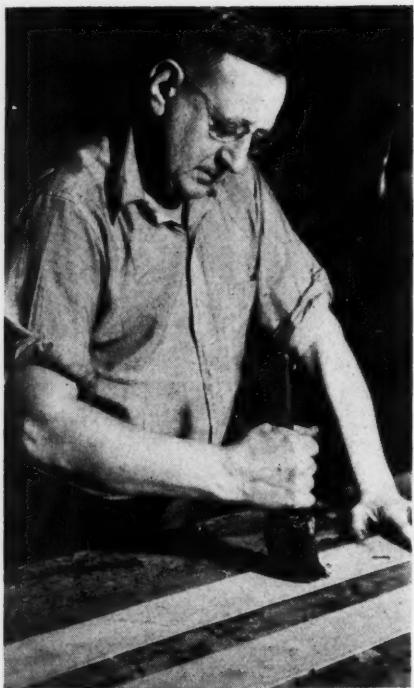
The Contacting Surfaces of the Pliers are Brushed with Glue, then the Glued Surfaces are Quickly Placed Together
